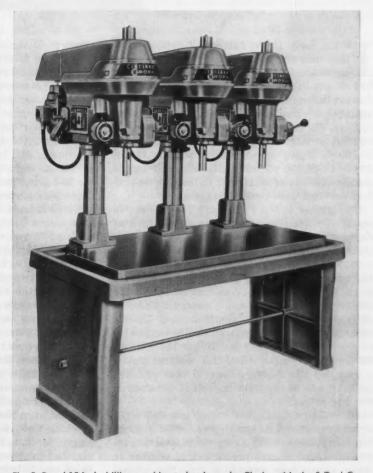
Royal 18-inch drilling machine to be shown by Cincinnati Lathe & Tool Co.
